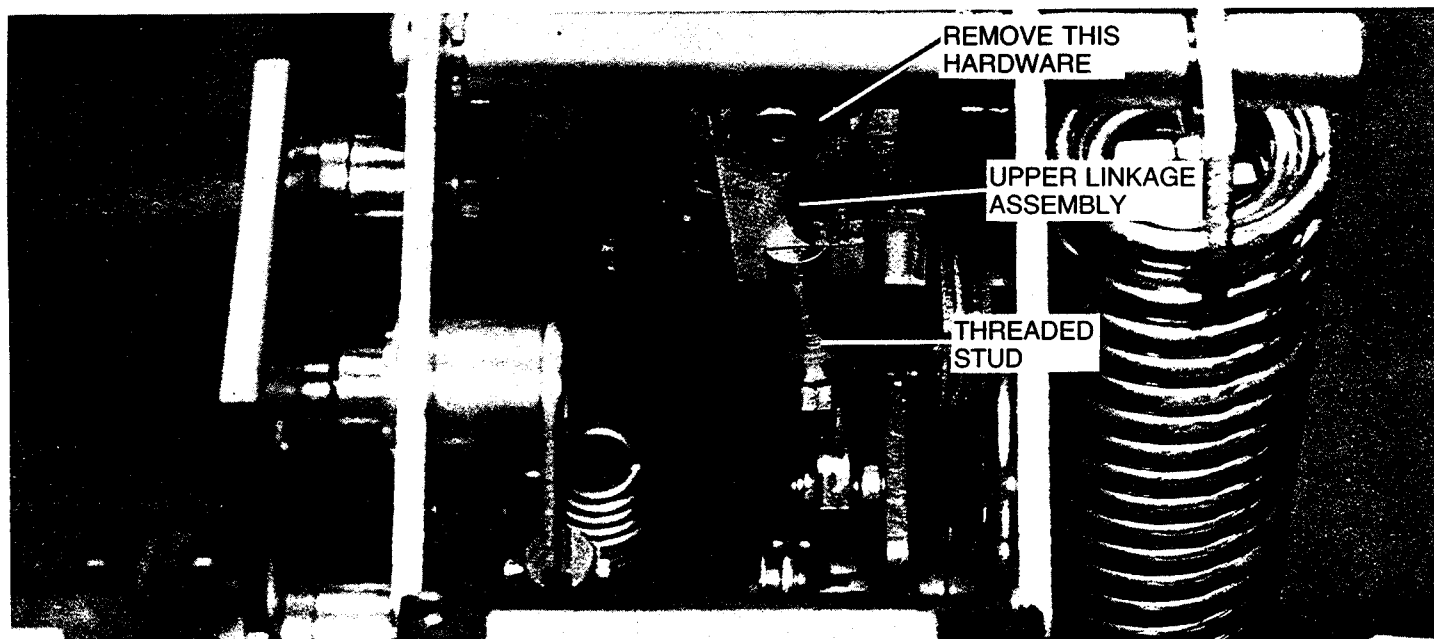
MANUAL HANDLE ADJUSTMENT
